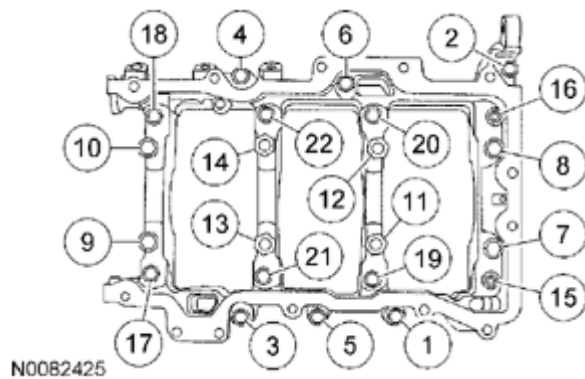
Identifying Lower Cylinder Block Bolts And Studs Removing Sequence
